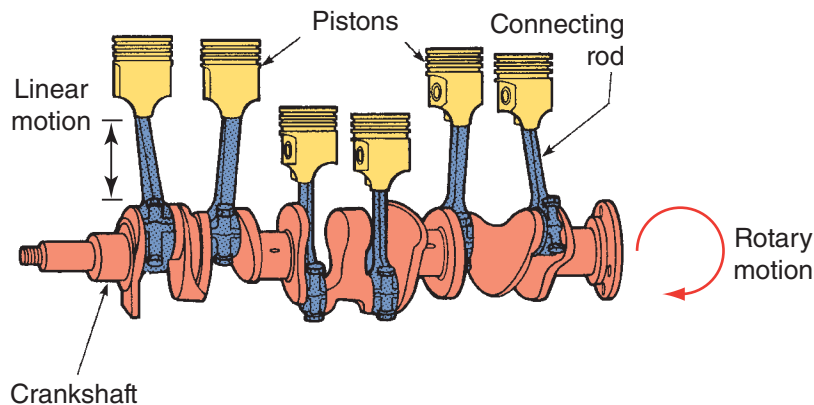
The linear (reciprocating) motion of the pistons is converted to rotary motion by the crankshaft.
